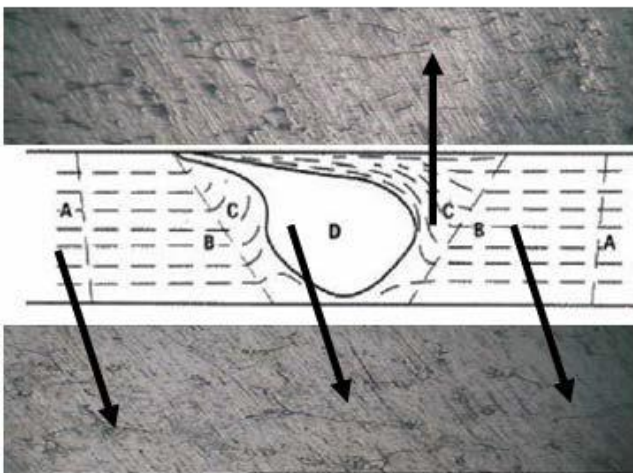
FSW Weld Showing Four Distinct Zones: (A) Base Metal (B) Heat Affected (C) Thermo mechanically Affected and (D) Stirred (nugget) Zone
